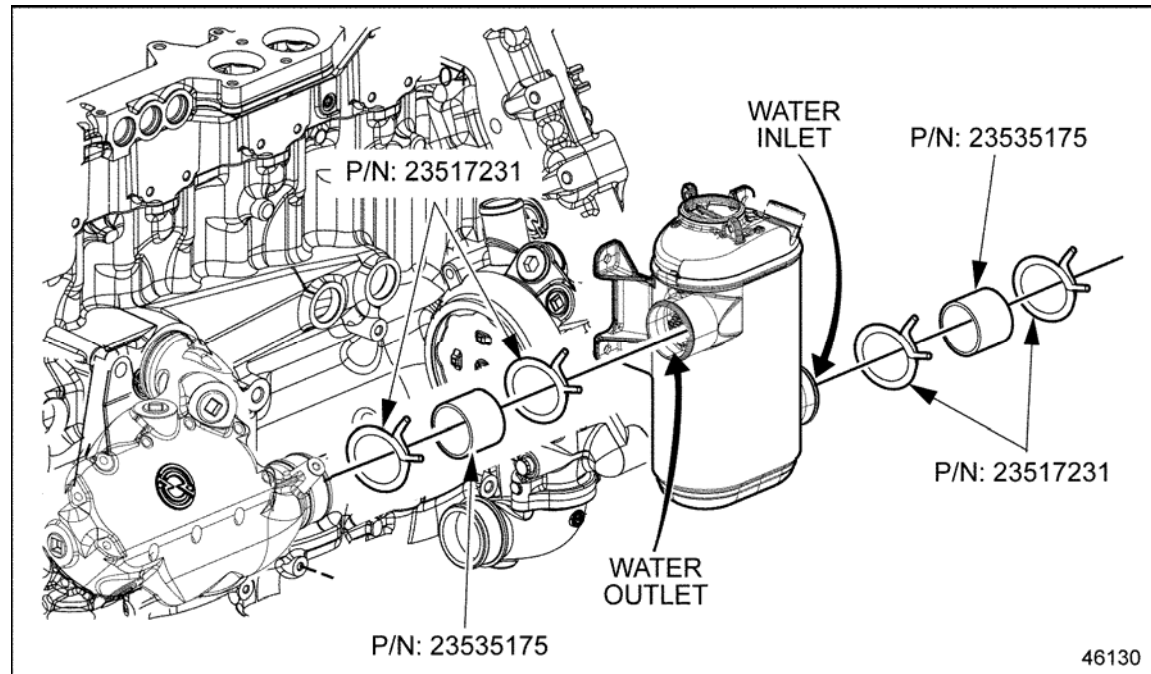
Hose and Spring Clamp Kit for EGR Cooler
